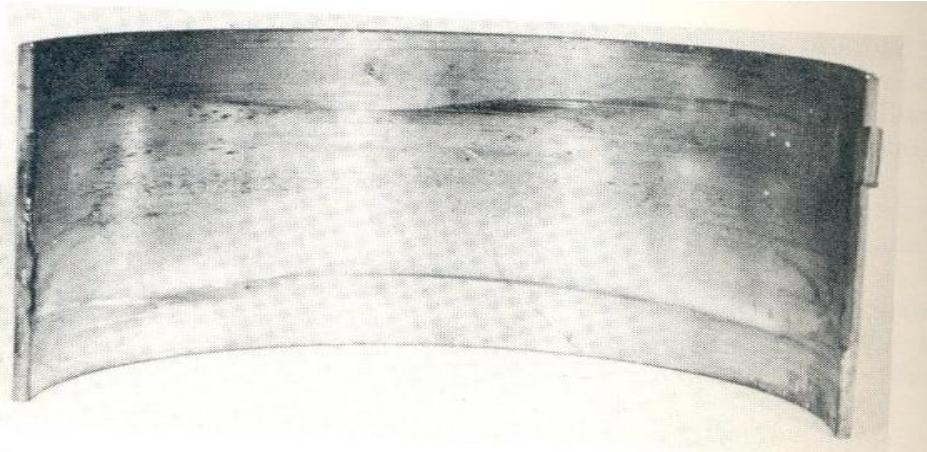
Bearing worn in the center by a barrel-shaped shaft.
